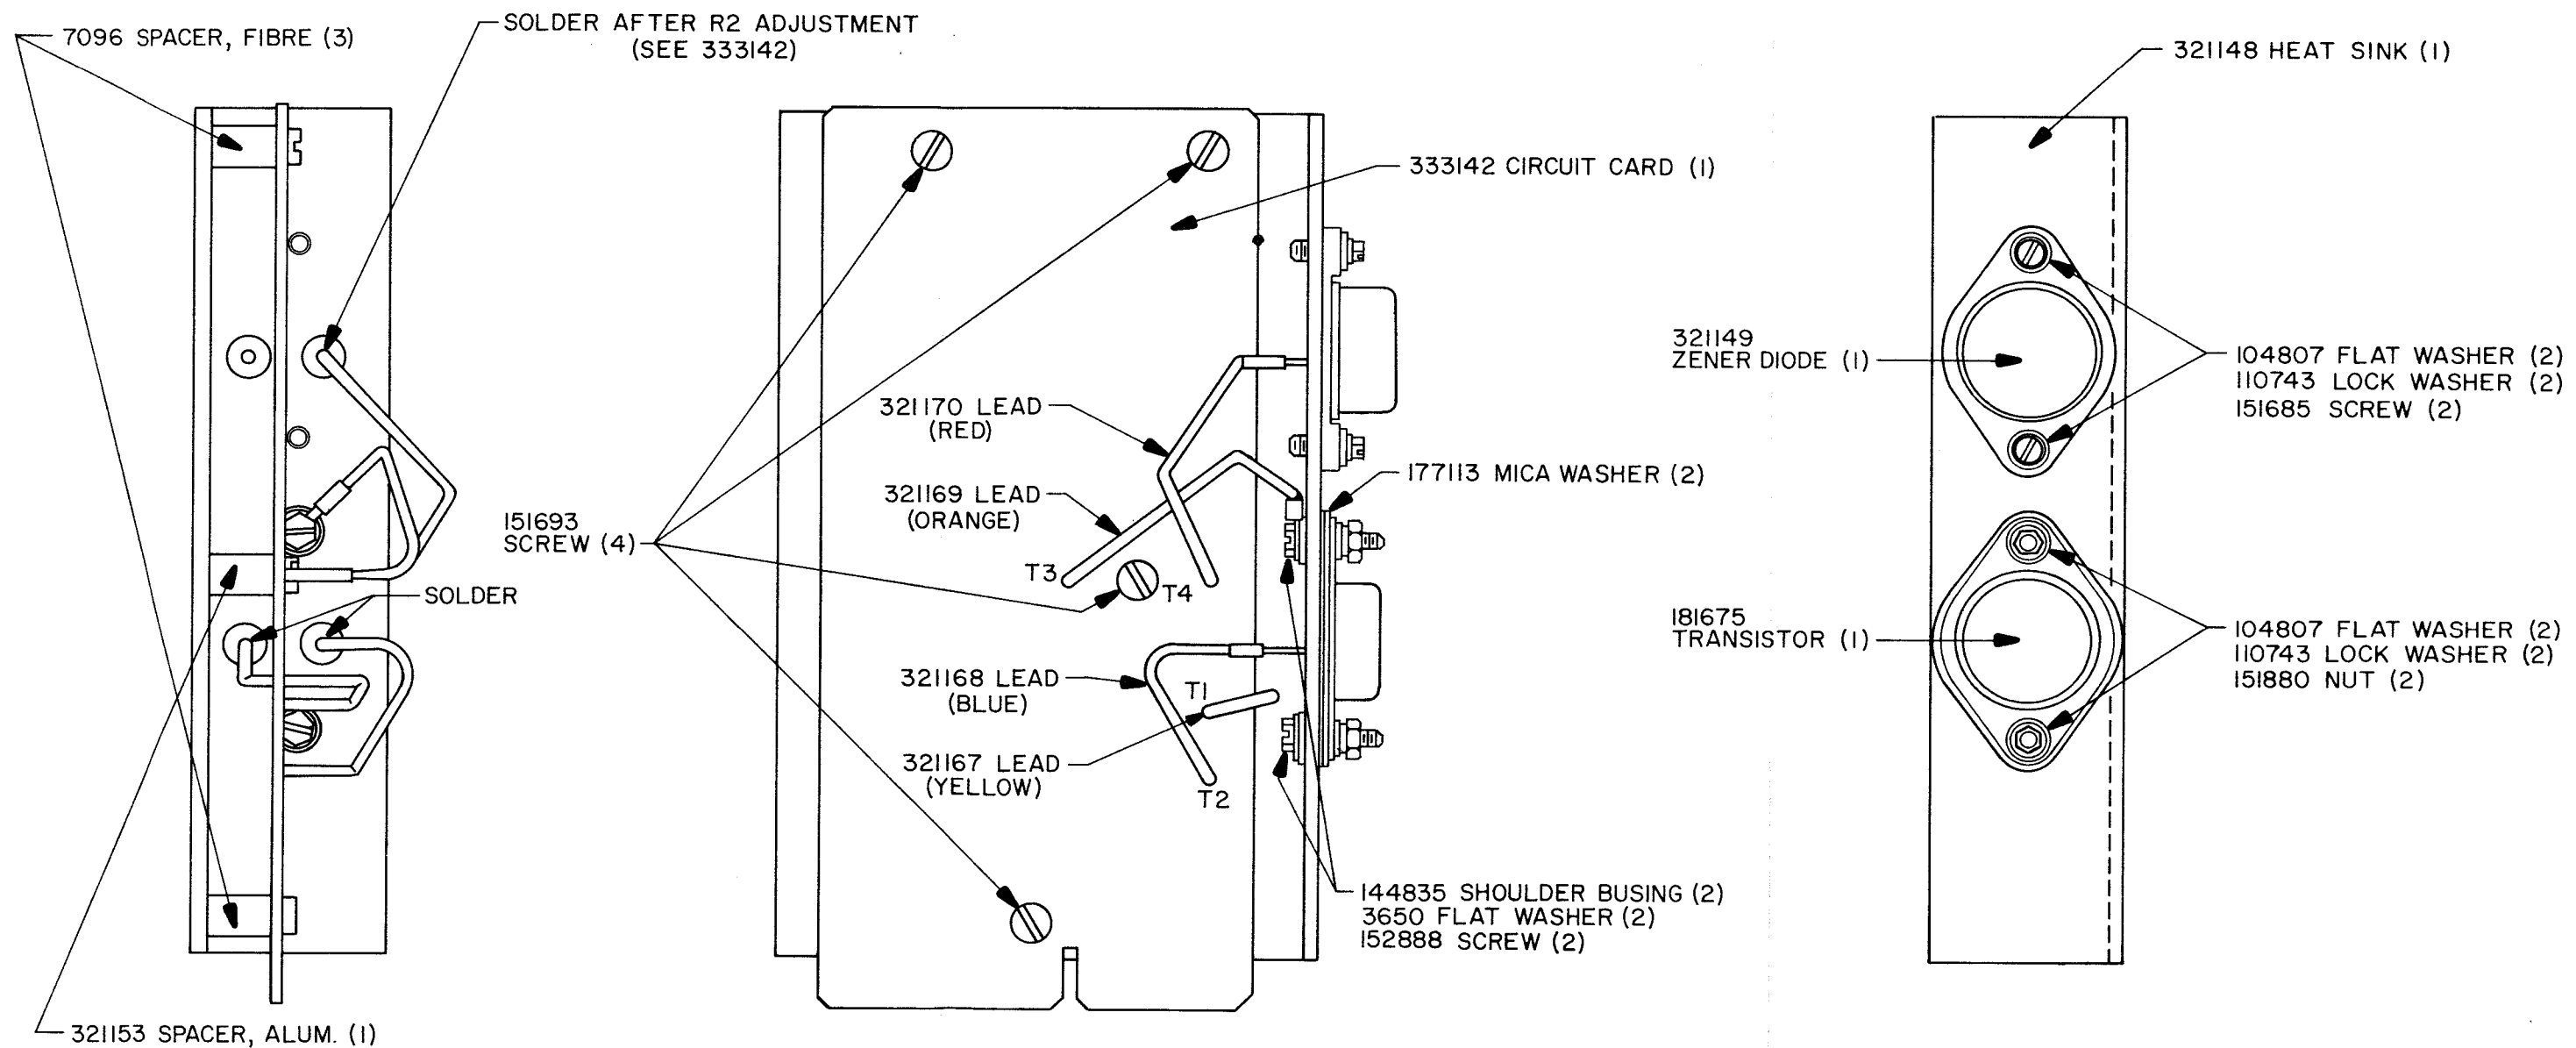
Assembly Drawing; Model 28 CPP KSR ESA
